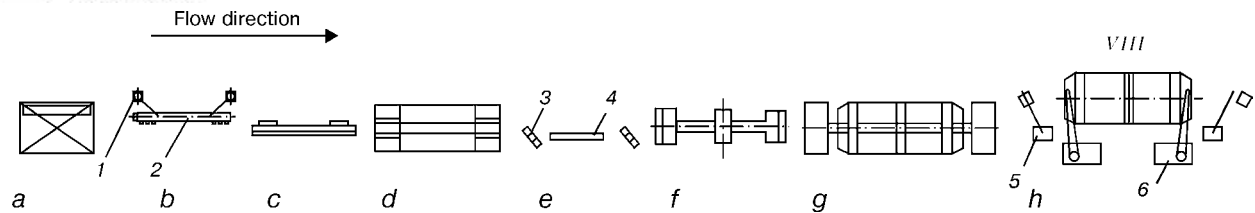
Schematic of a section for assembly and welding of frames of a car for mineral transportation: *a* — container for Z-section; *b* — bench for main beam assembly; *c* — automatic welding machine; *d* — two-sided drilling machine; *e* — tilting carriage for rest riveting; *f* — bench for frame assembly; *g* — trunnion welding positioner; *h* — bench for drilling and riveting the step brackets (for other designations see the text)
